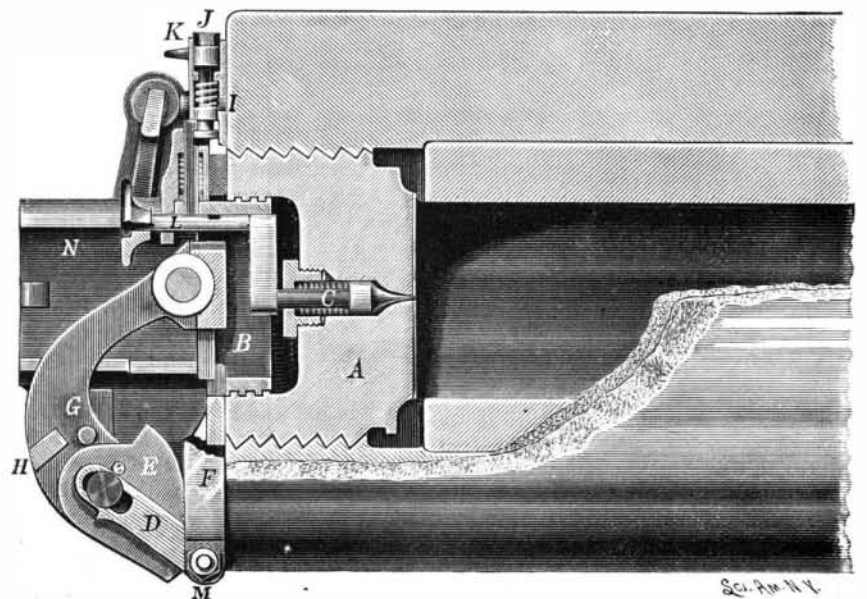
HORIZONTAL SECTION OF MODIFIED MECHANISM ON AXIS OF GUN.
